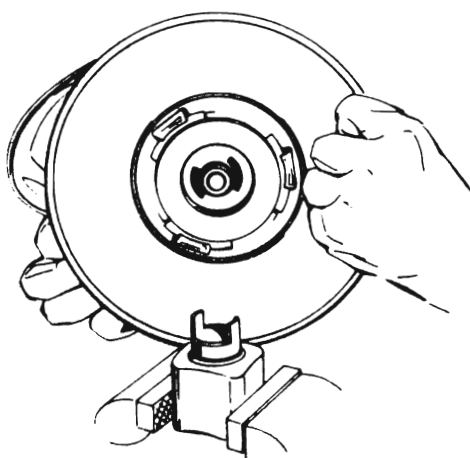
Positioning Secondary Power Piston In Tool J-23101 (Large Dia. End Up) Mounted In Vise
